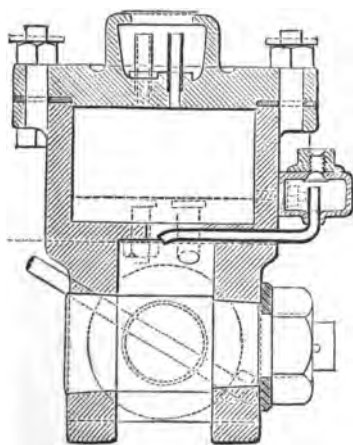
shows a crosshead for a single slide bar, designed by Mr. Adams for the engines of the Great Eastern Railway. The slide block is in two parts, of cast iron. A projection below receives the end of the piston rod cottered in a conical hole. Forked jaws carry the crosshead pin. The connecting-rod small end is single with a solid bush. Six  $\frac{7}{8}$  in. bolts connect the two parts of the slide block. The slide bar is 8 in.  $\times$  3 in. of steel, with holes through it to permit the oil to reach the under side. The pressure on the slide block is about 40 lbs. per sq. in.
